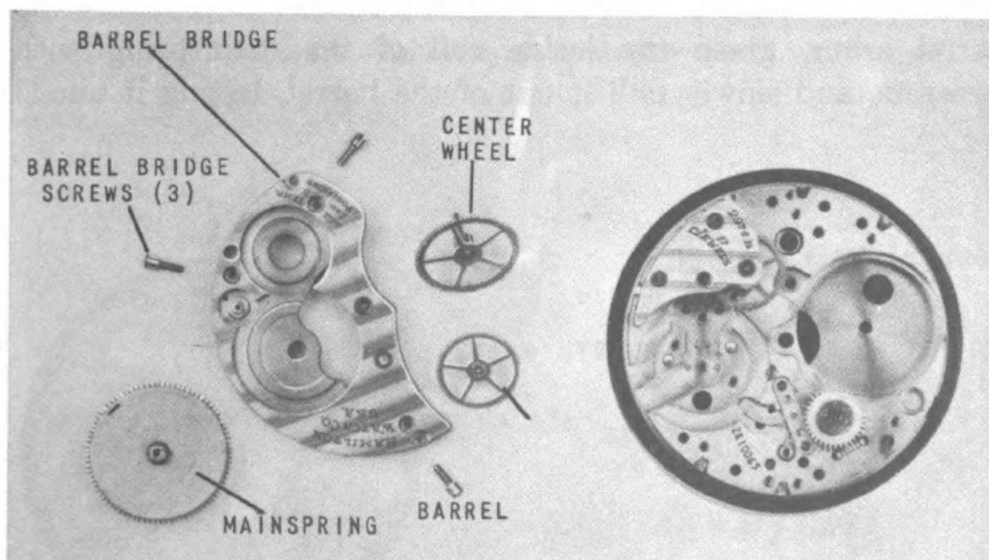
Barrel bridge with barrel, center wheel and third wheel removed.
